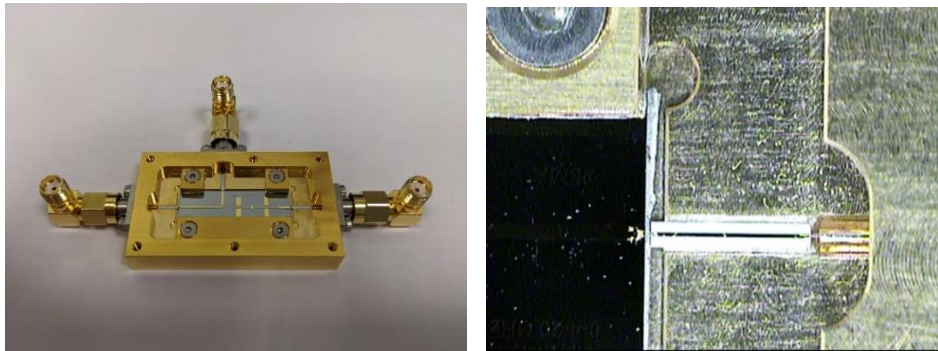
[Left] Diplexer packaged in a housing; [Right] bonding wires between components.
